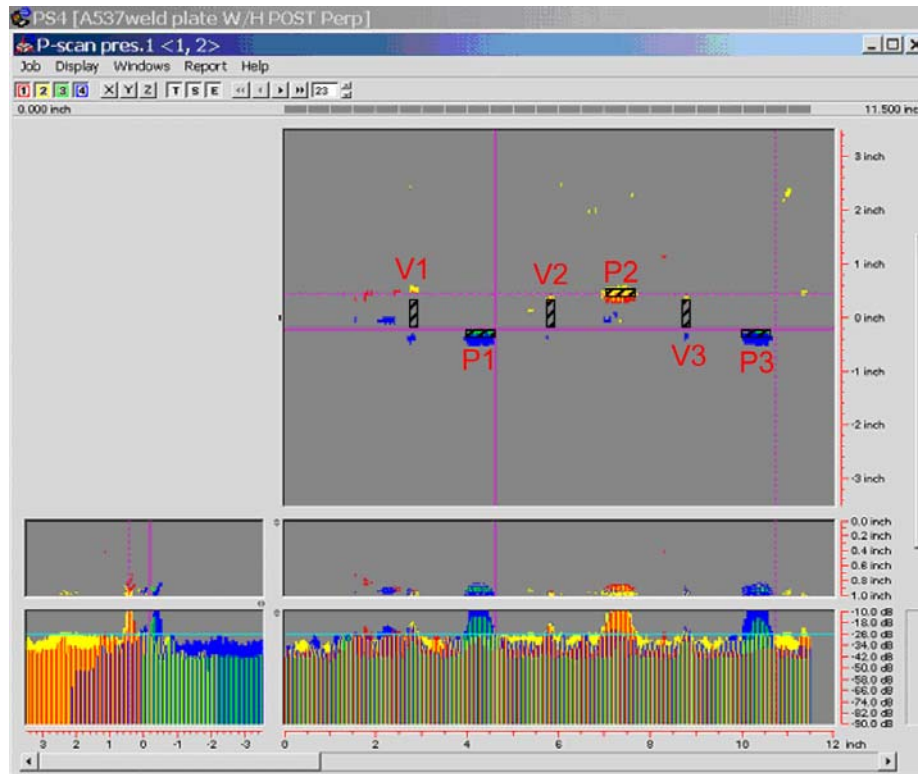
P-scan for stress corrosion cracking parallel to the weld for the heat-treated and stress relieved plate.
